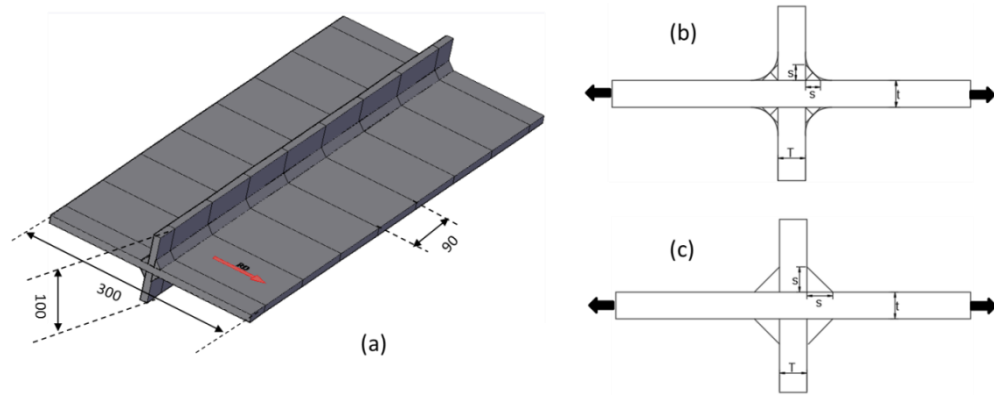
Cruciform test specimen geometry extracted from a block: (a) 3D view; (b) 2D cross section and weld size definitions of TIG welds; (c) 2D cross section and weld size definition of MIG welds
